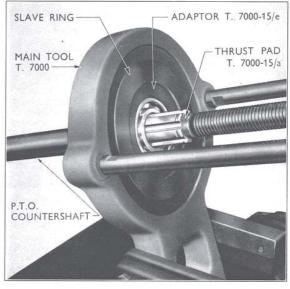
Removing P.T.O. Countershaft Rear Bearing
